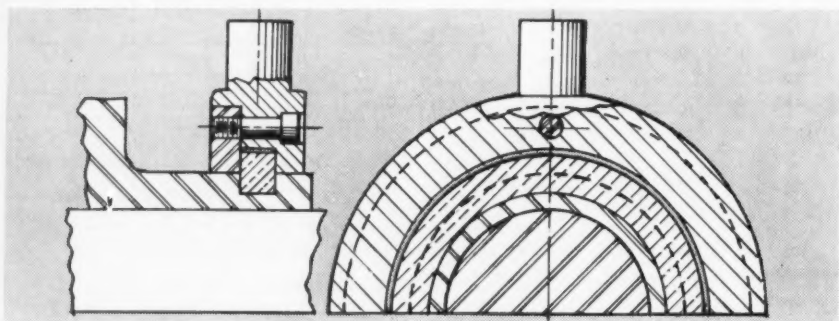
The shifting collar in this assembly is made of cast iron and is solid instead of being split. The hub of the element being shifted is grooved so as to receive a bronze ring.
